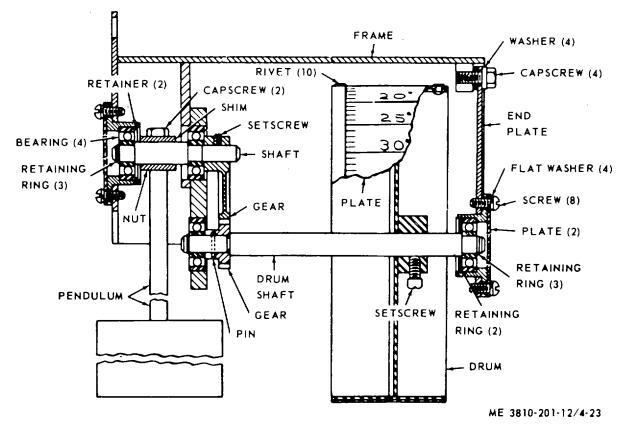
Radius (boom angle) indicator, disassembly and reassembly. 4-21
